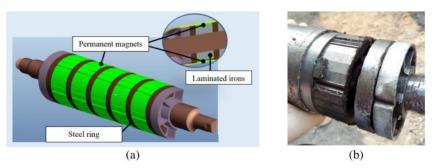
Rotor modification (a) rotor schematic, (b) modified rotor.
